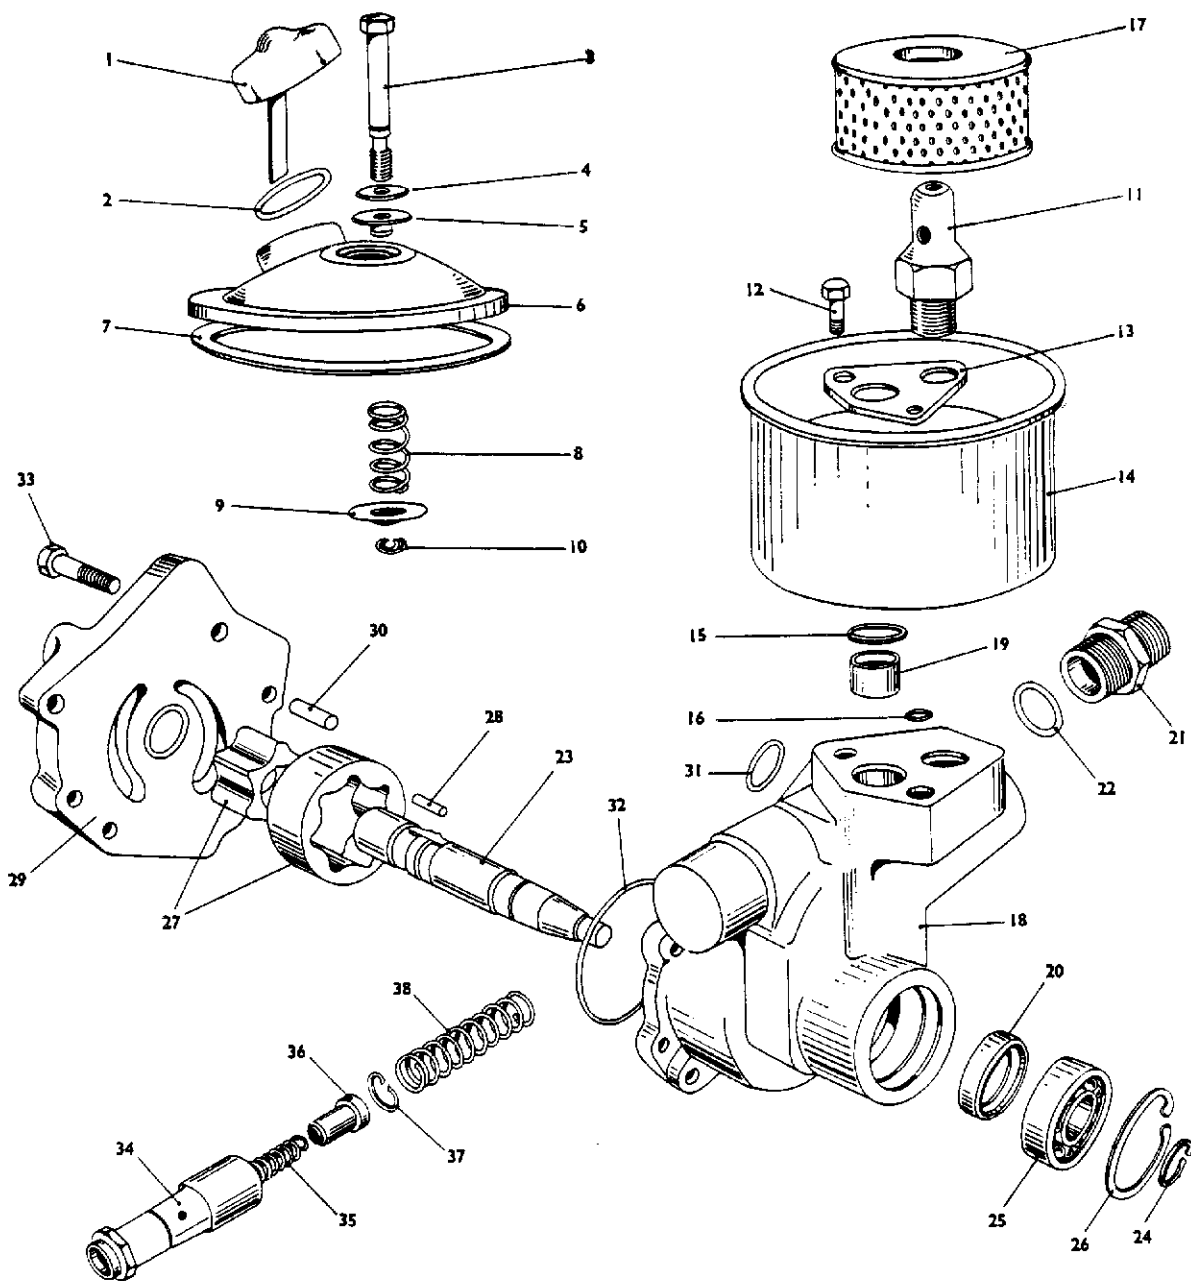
HYDRAULIC PUMP ASSEMBLY 902356
